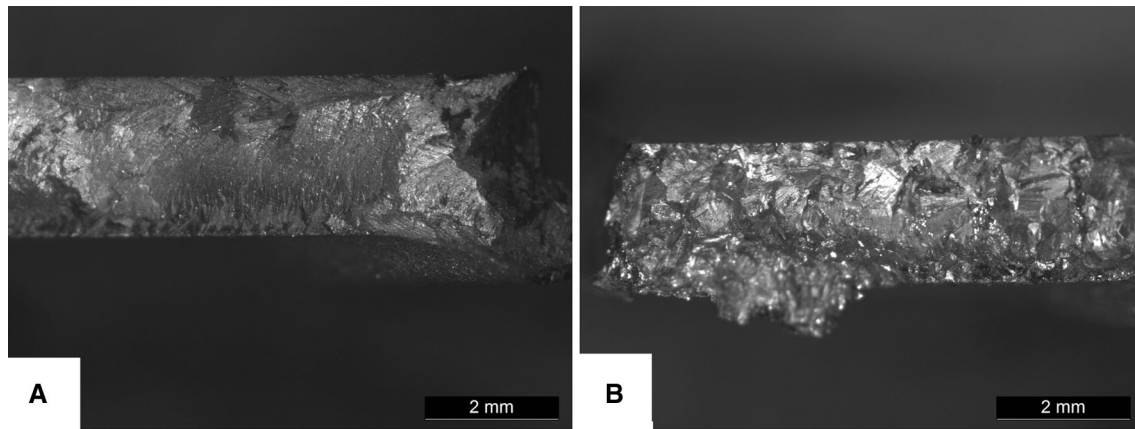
Fracture surface of a TT-CAS and b TT-MIM, after fatigue failure
